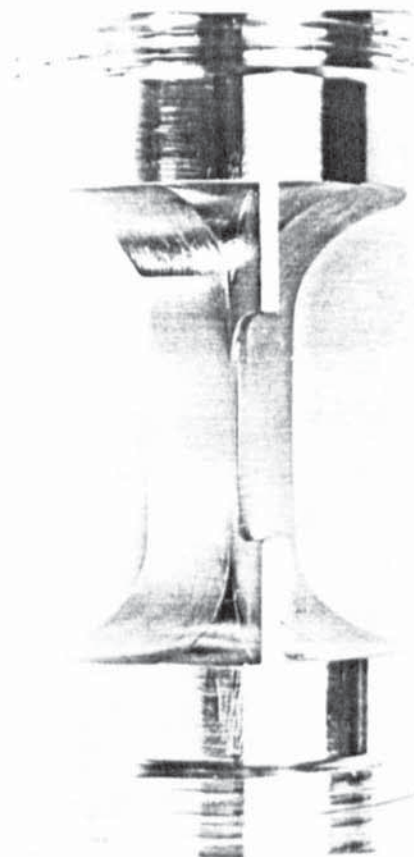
Short Corner-Crack Specimen with Fin Removed.
